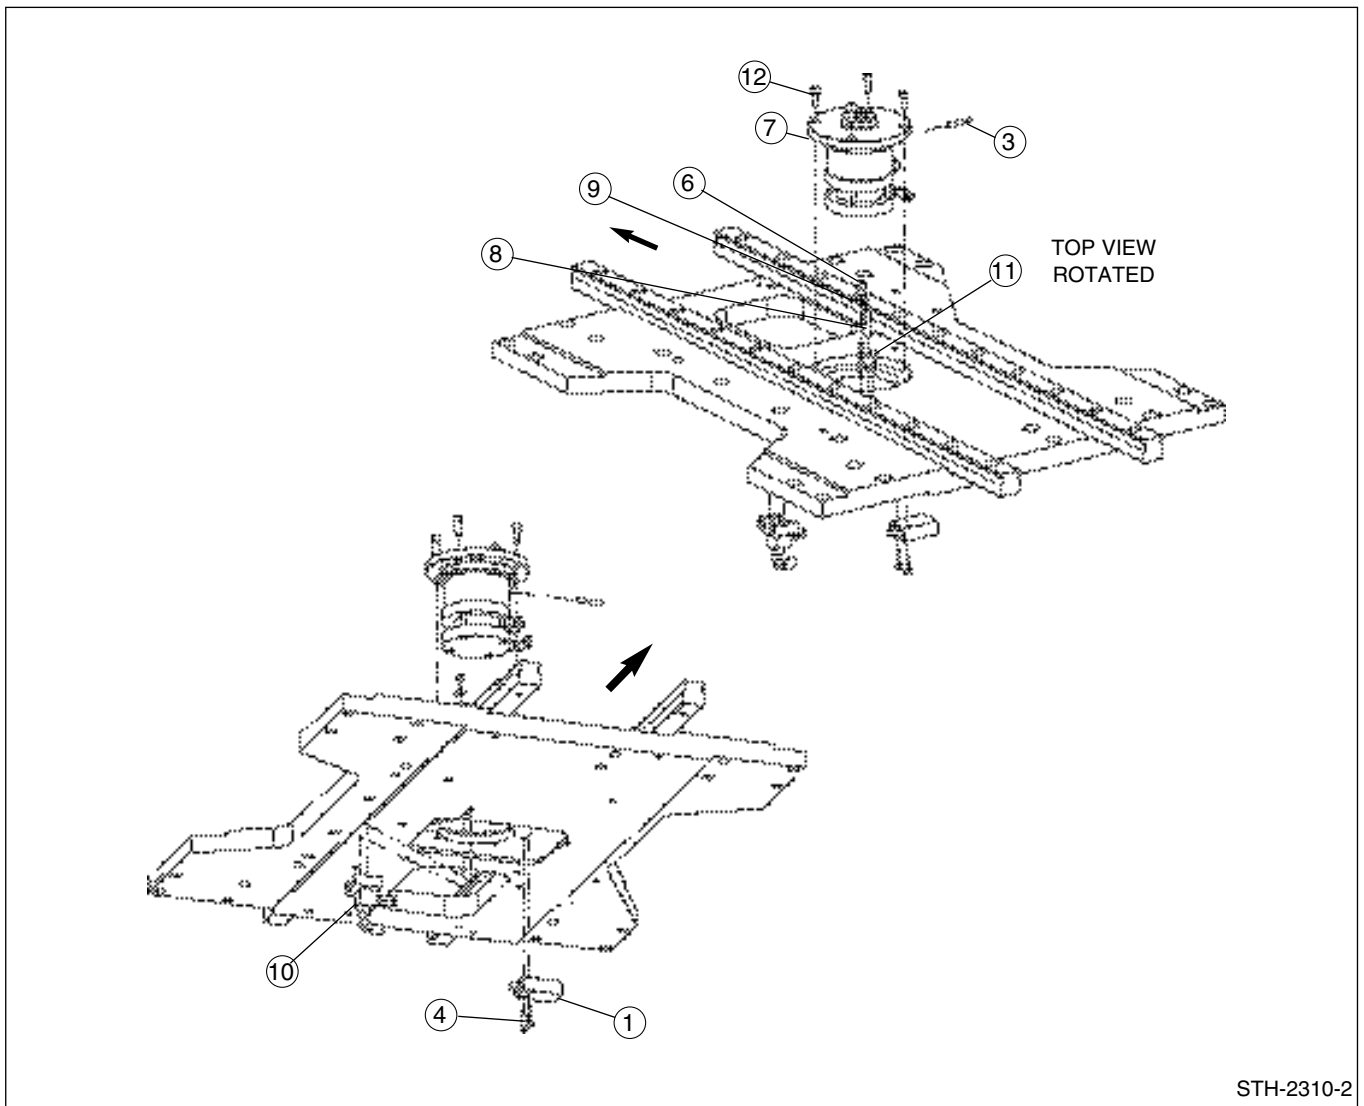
FIGURE H – CARRIAGE ASSEMBLY (1 of 3)
